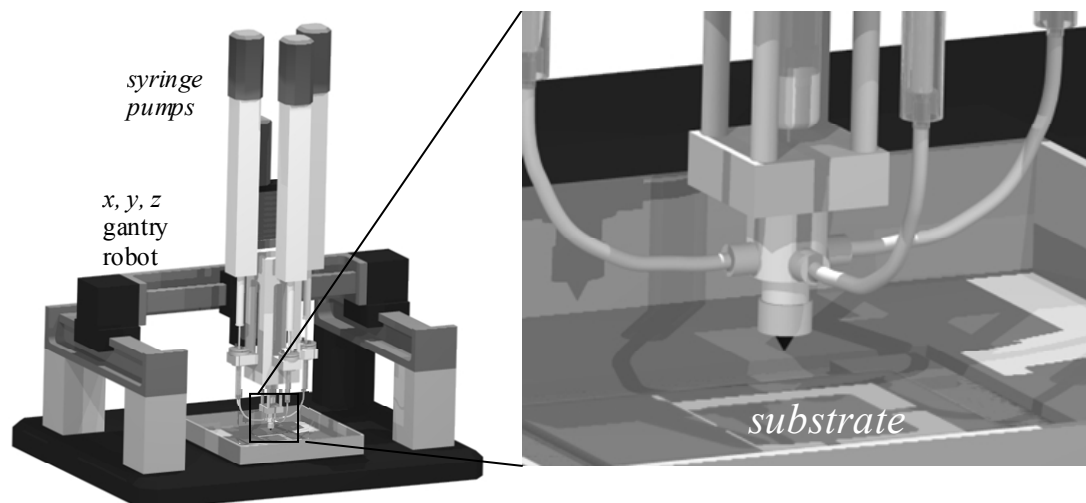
Modification of the robocasting device for multi-material printing showing the mixing chamber
